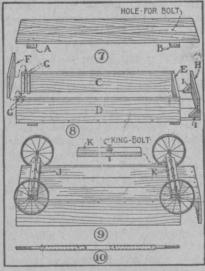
shows the wagon bed. Fasten the boards together by means of the cheatin'." two-by-four crosspieces A and B. Then cut the side boards C and D and nail them to the edges, and cut the end boards E and F to fit between. Fasten end E between the sides, and form grooves by means of the strips G (Fig. 8) for the end F to drop into. Dashboard H is of the same size as E. Brace it with the brackets I.
